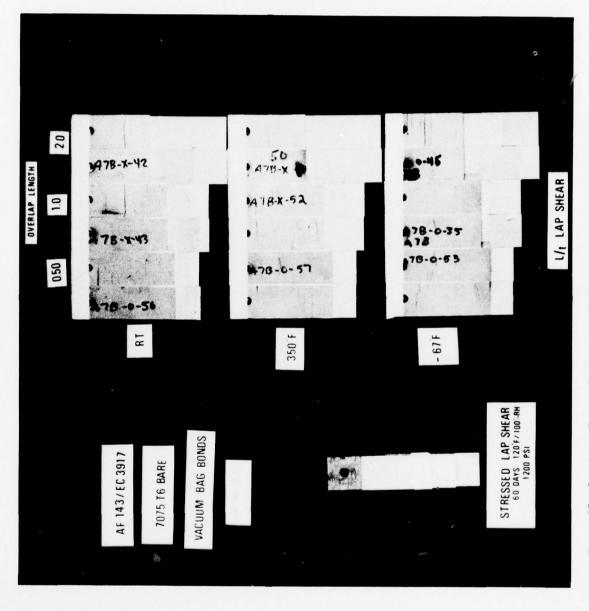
Specimen Failure Surfaces—AF 143, Optimized FPL Etch, Vacuum Bag Bonds
